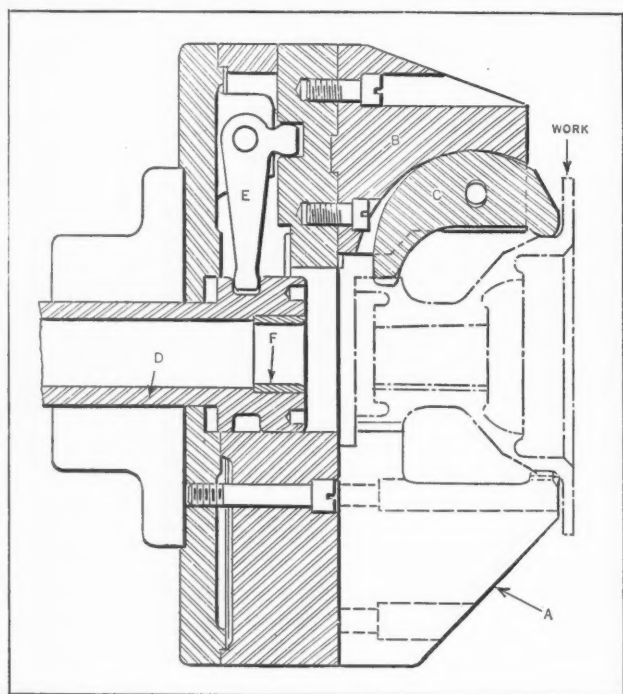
Lathe Chuck for Holding Odd-shaped Castings
